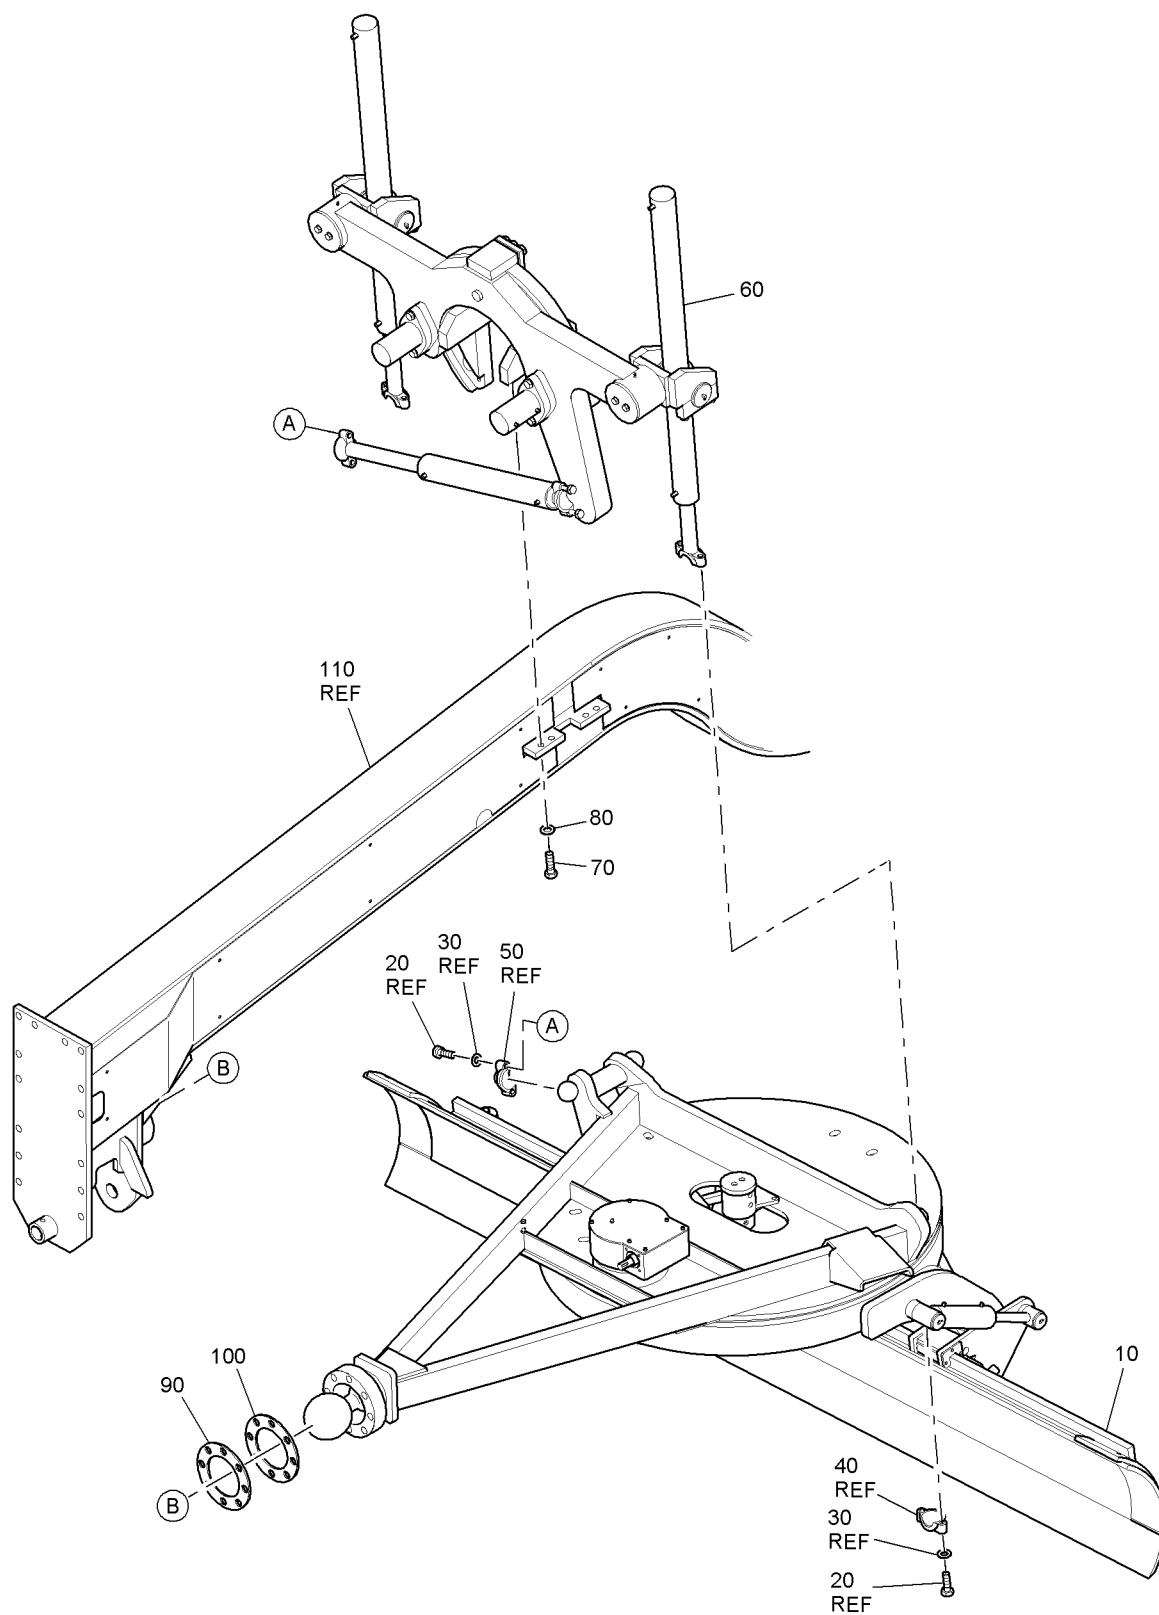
YOKE AND MOLDBOARD ASSEMBLY
